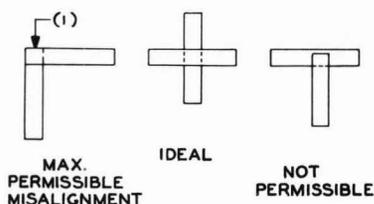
Fig. K — Alignment of Standard Contacts — Plan View of Contact Surfaces
